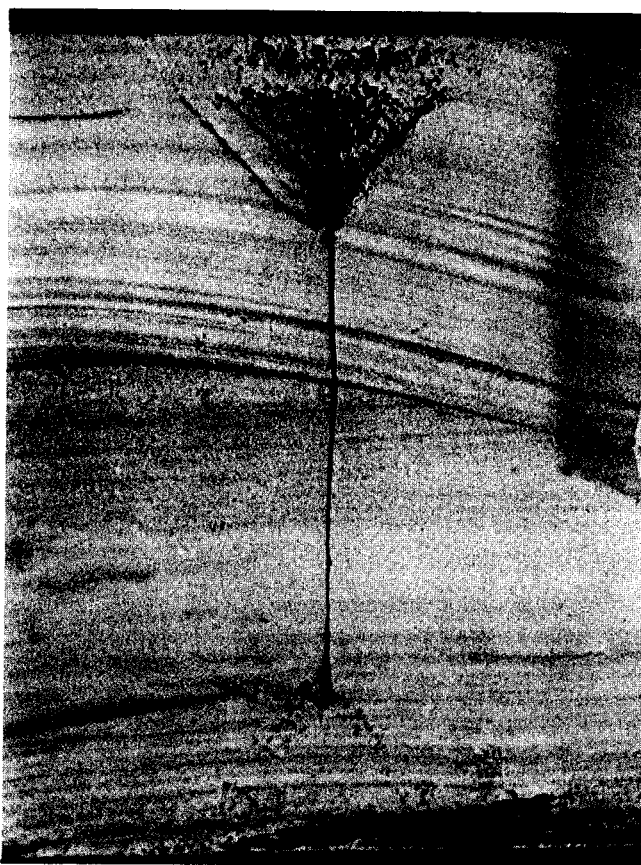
(b) CRACK IN FLANGE-TO-WEB FILLET WELD
